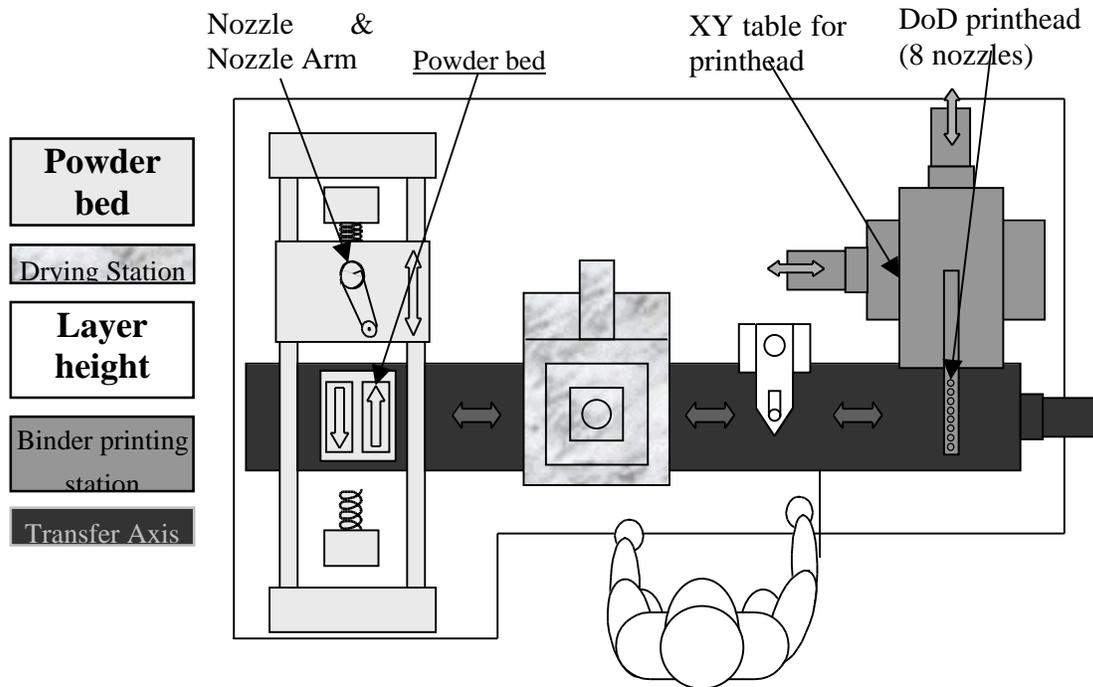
A schematic of the linear machine that has been built for prototyping of small parts by 3D Printing. This machine is a stepping stone to the full rotary machine illustrated in figure 7.
